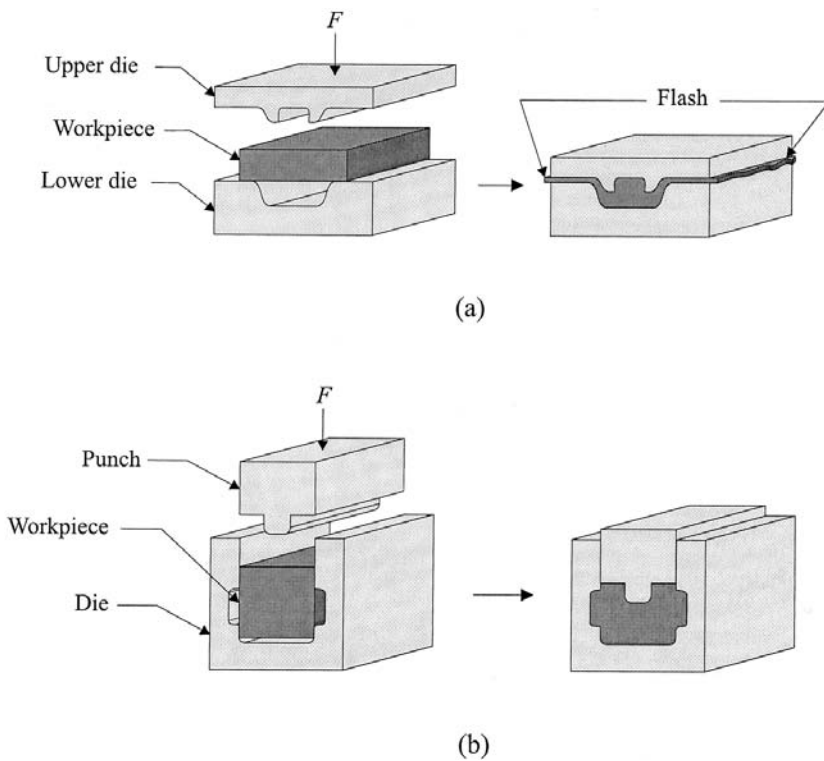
Closed die forging (a) with flash; (b) without flash.
